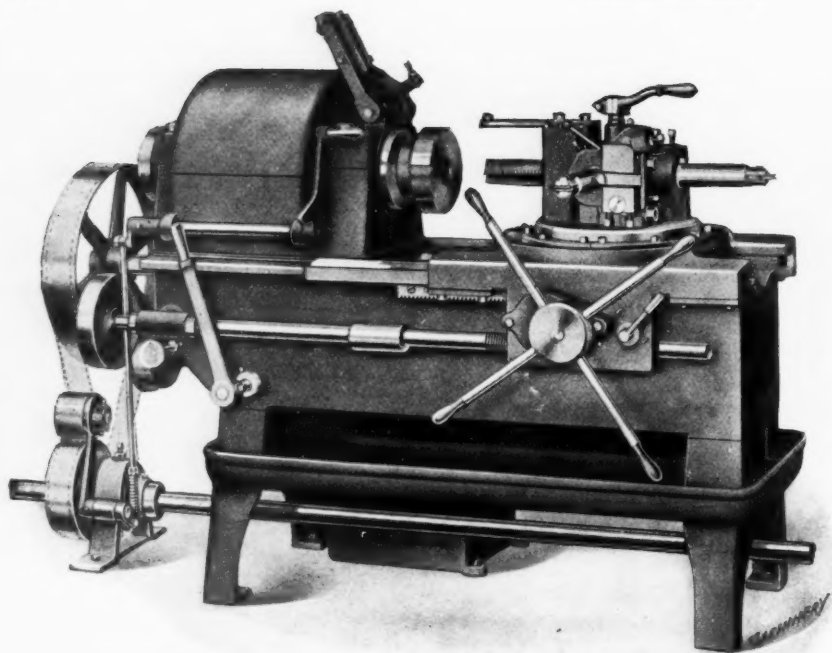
Blood Turret Lathe for machining 3-inch Shrapnel and High-explosive Shells
